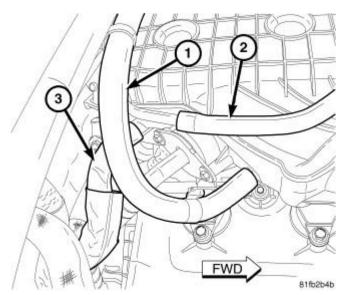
Fuel Rail, Ignition Coil, Lower Intake Manifold & Hose Courtesy of CHRYSLER LLC
